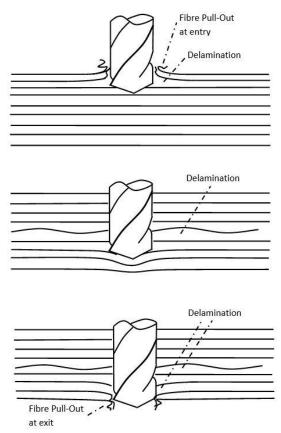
Machining may cause debounding, fibre pull out and delamination.
